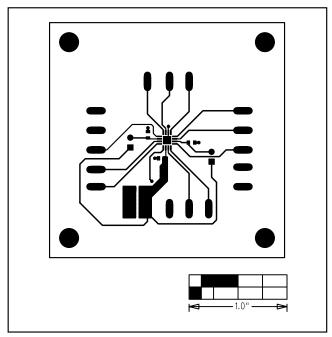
MAX4754A EV Kit PCB Layout—Component Side
